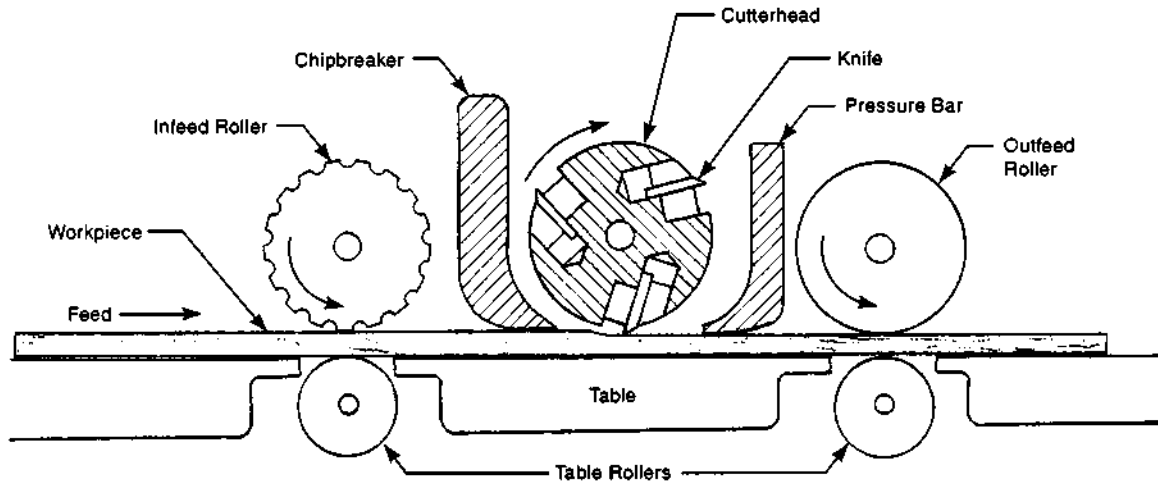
B2a Drawing showing the planing operation that leaves a smooth surface on a board and machines it to a prescribed thickness.
